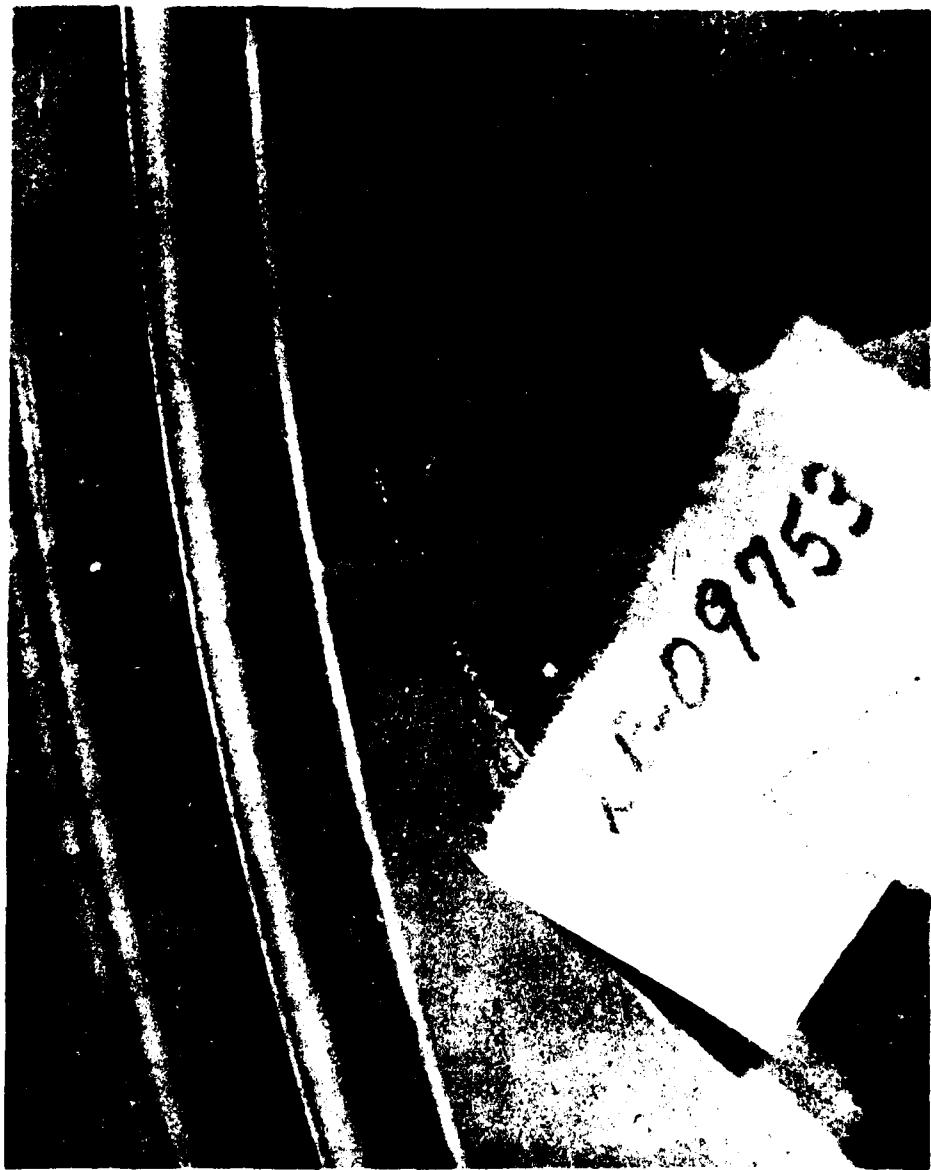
Cracks in vane-to-outboard shroud joint at trailing edge of power turbine nozzle, 192.7 operating hours.
